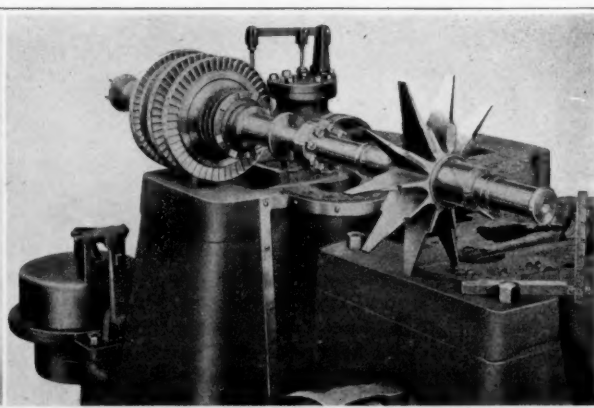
THE ROTOR REMOVED FROM THE BEARING
